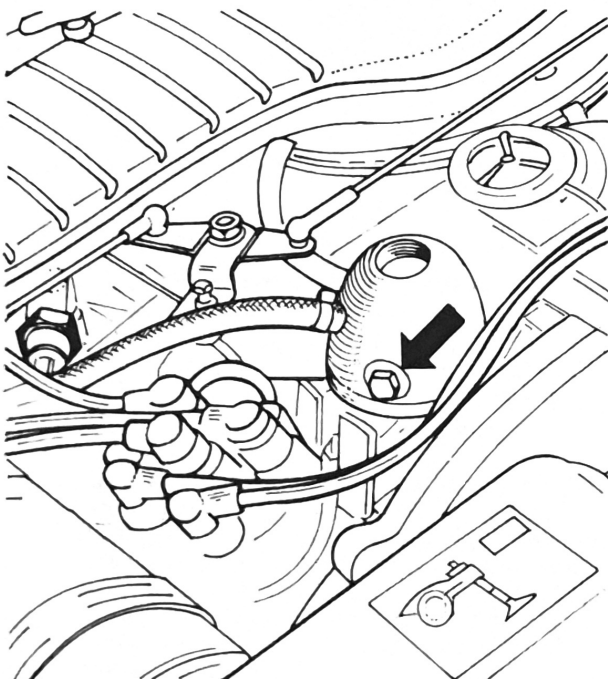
2 Typical fuel filter plug on mechanical fuel pump
